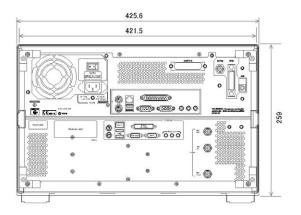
Dimensions (rear view, in millimeters, nominal)
